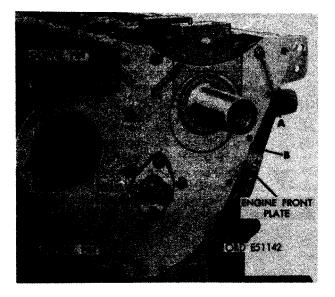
REMOVING OR INSTALLING ENGINE FRONT PLATE.
